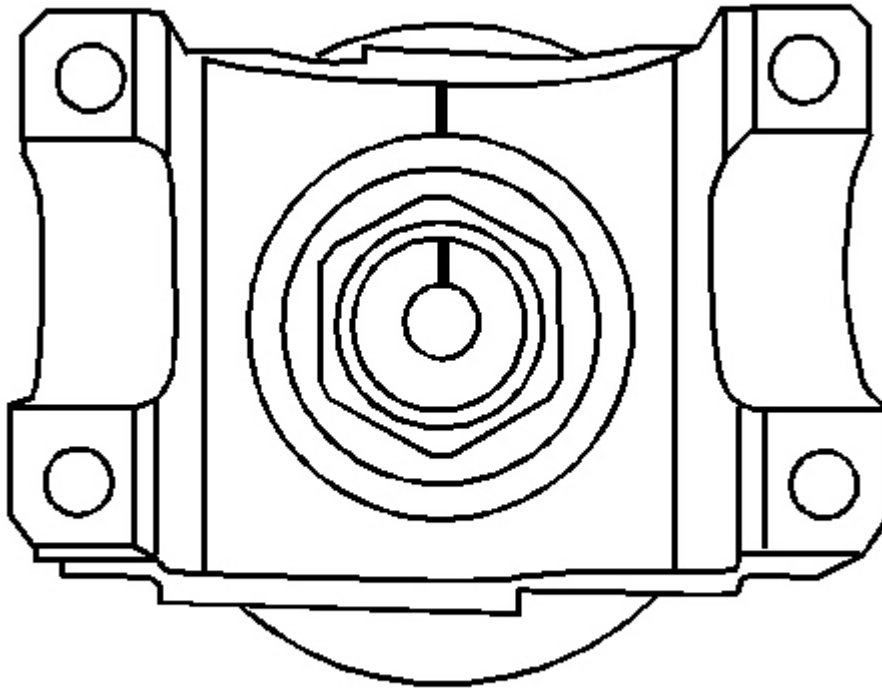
View Of Pinion Shaft & Pinion Yoke Alignment Marks
